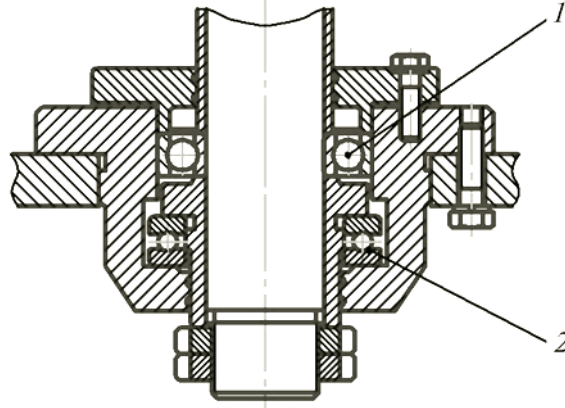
Typical design of rotary-press supports: 1) radial bearing; 2) thrust bearing.
